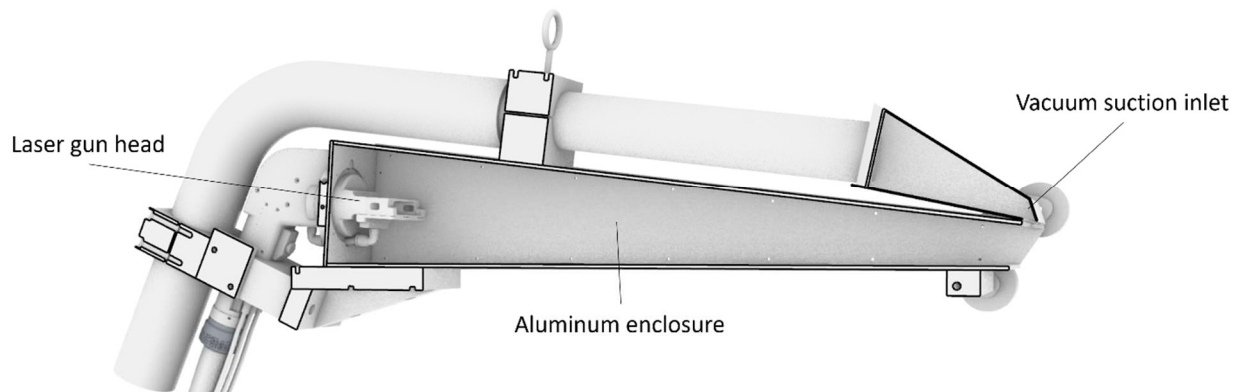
Schematic illustration of the Hempel hand-held prototype unit.
